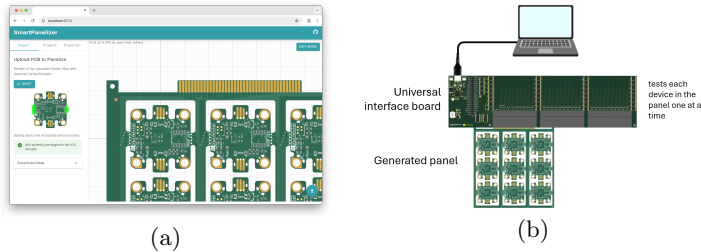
(a) SmartPanelizer is a web application that accepts a PCB design and produces panelized fabrication files augmented with built-in test infrastructure. (b) When a manufactured panel is delivered from the factory, it may be plugged into a universal interface board which automatically uploads firmware to each device and tests it, simplifying the device commissioning and testing process.
